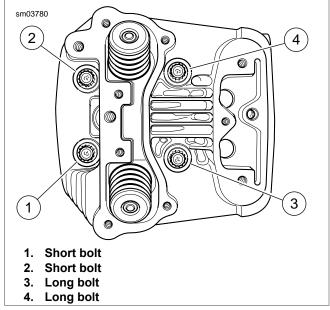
Rear Cylinder Headbolt Torque Sequence
